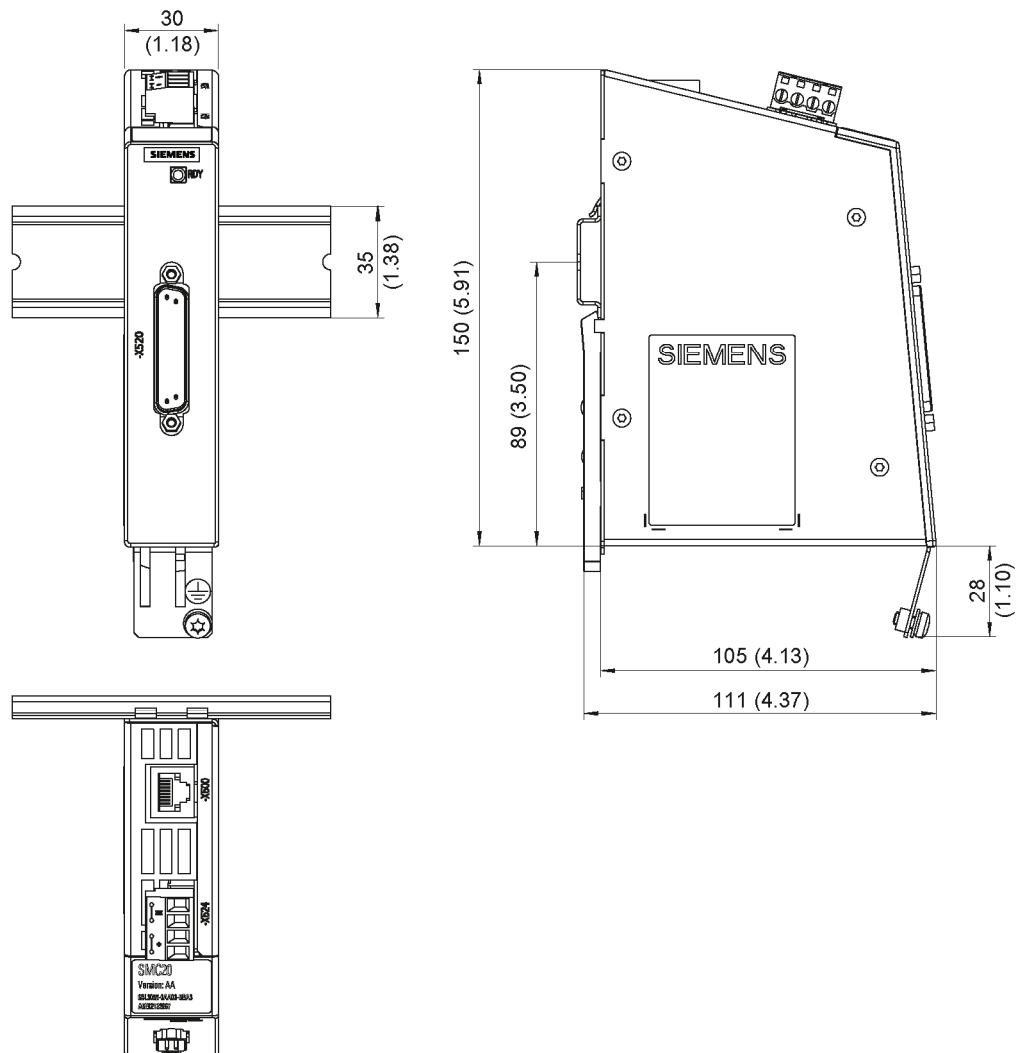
Dimension drawing of the Sensor Module Cabinet SMC20, all data in mm and (inches)
